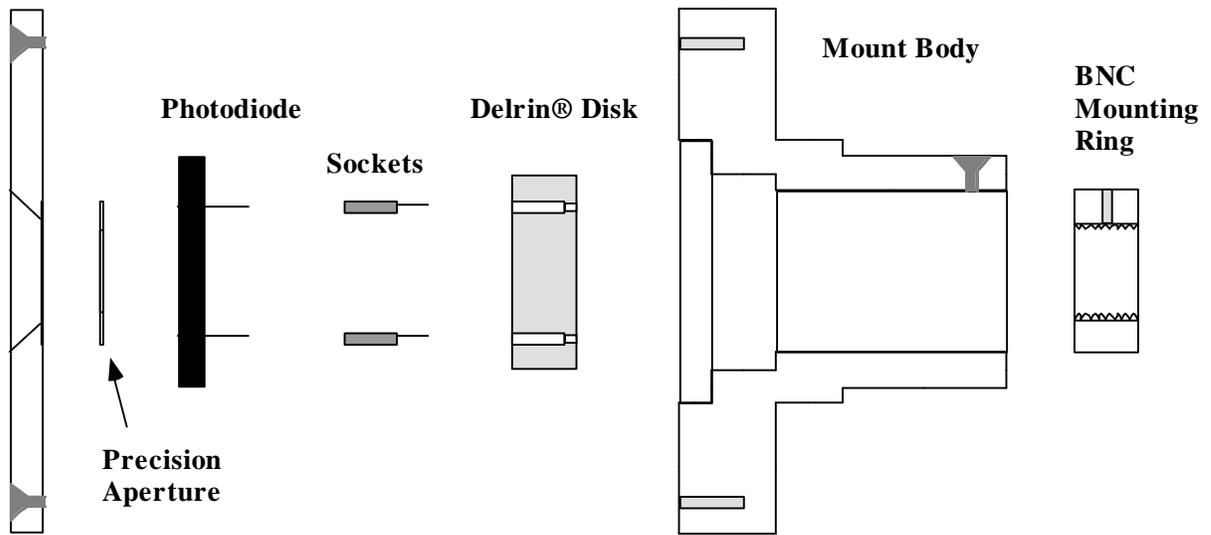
Exploded view diagram of Hamamatsu S1337-1010BQ fixture.
